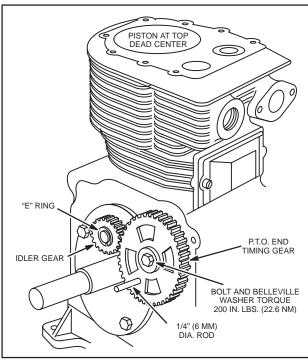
INSTALLING AND TIMING PTO DRIVE GEAR
